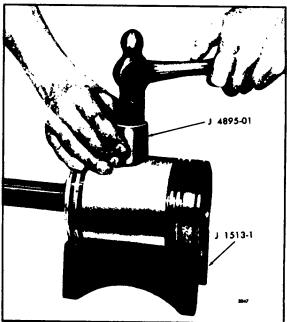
Installing Piston Pin Retainer with Tool J 4895-01
